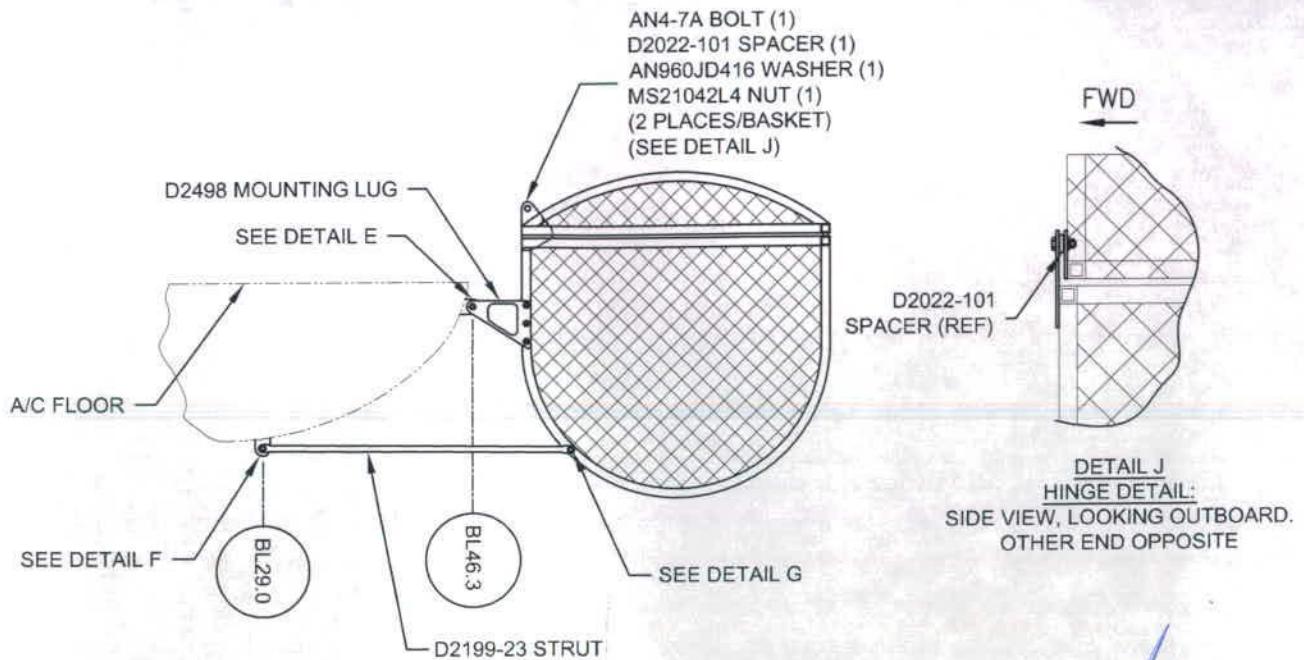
Section A-A Looking Fwd at STA 84.29
